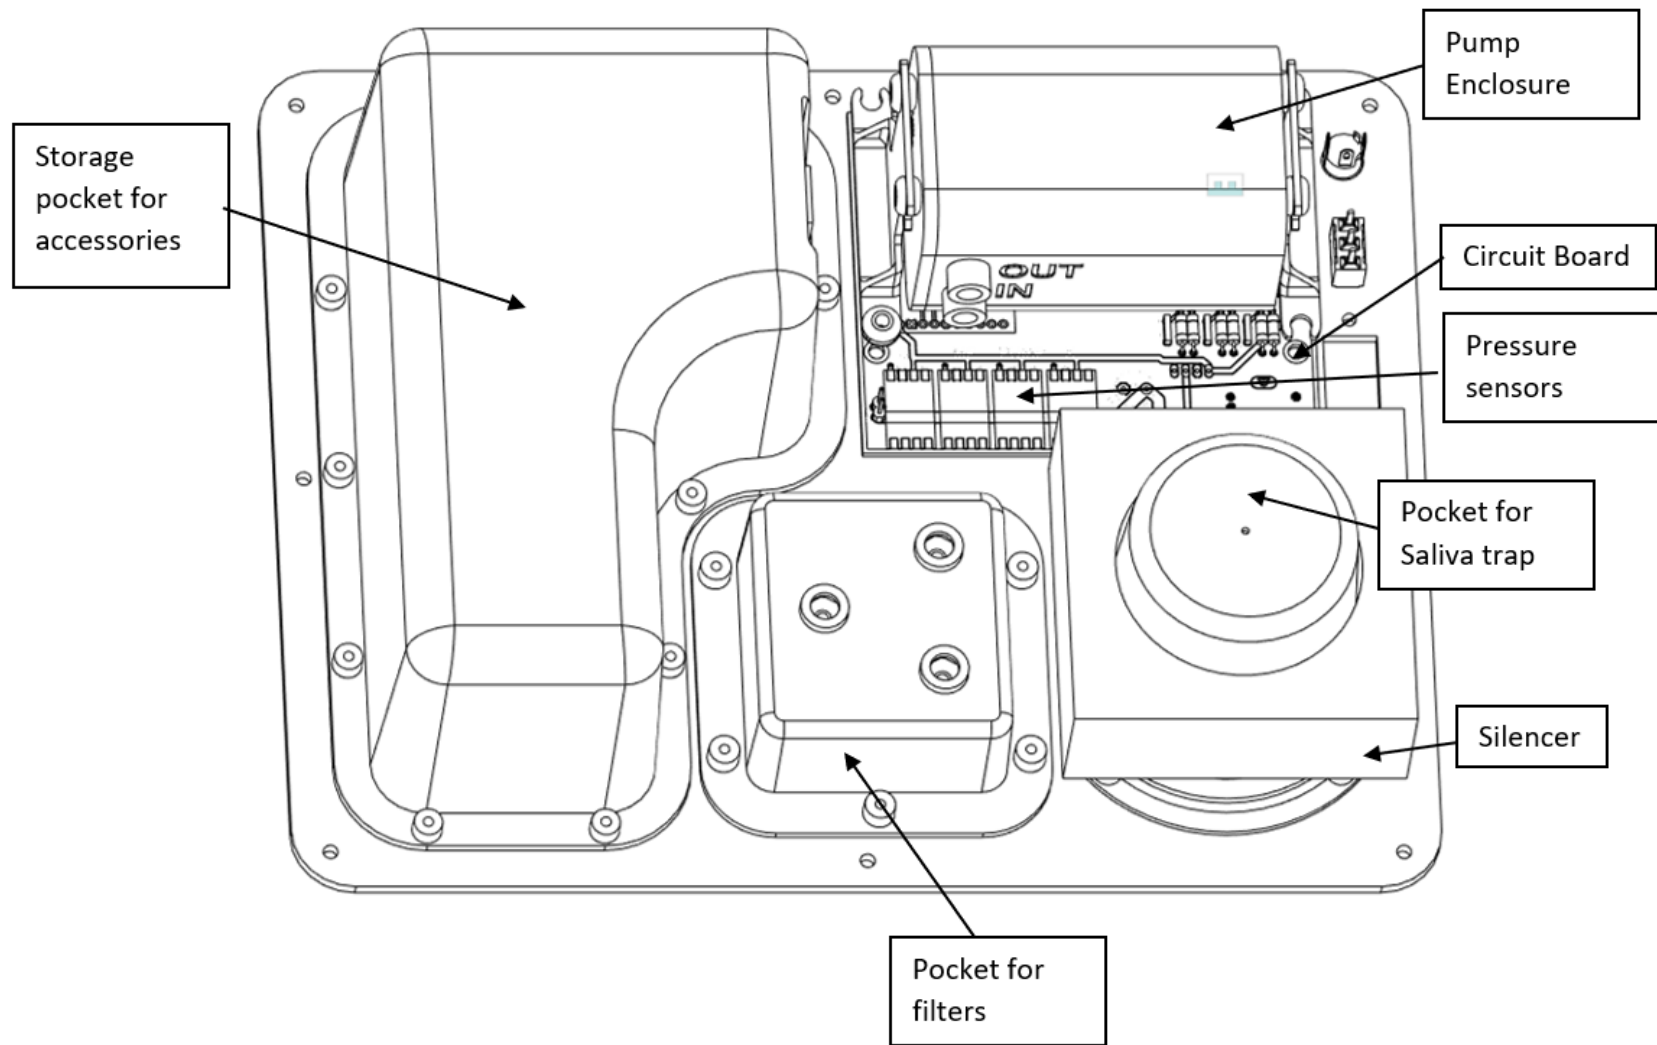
bottom view of the pump unit with enclosure removed and plumbing omitted
